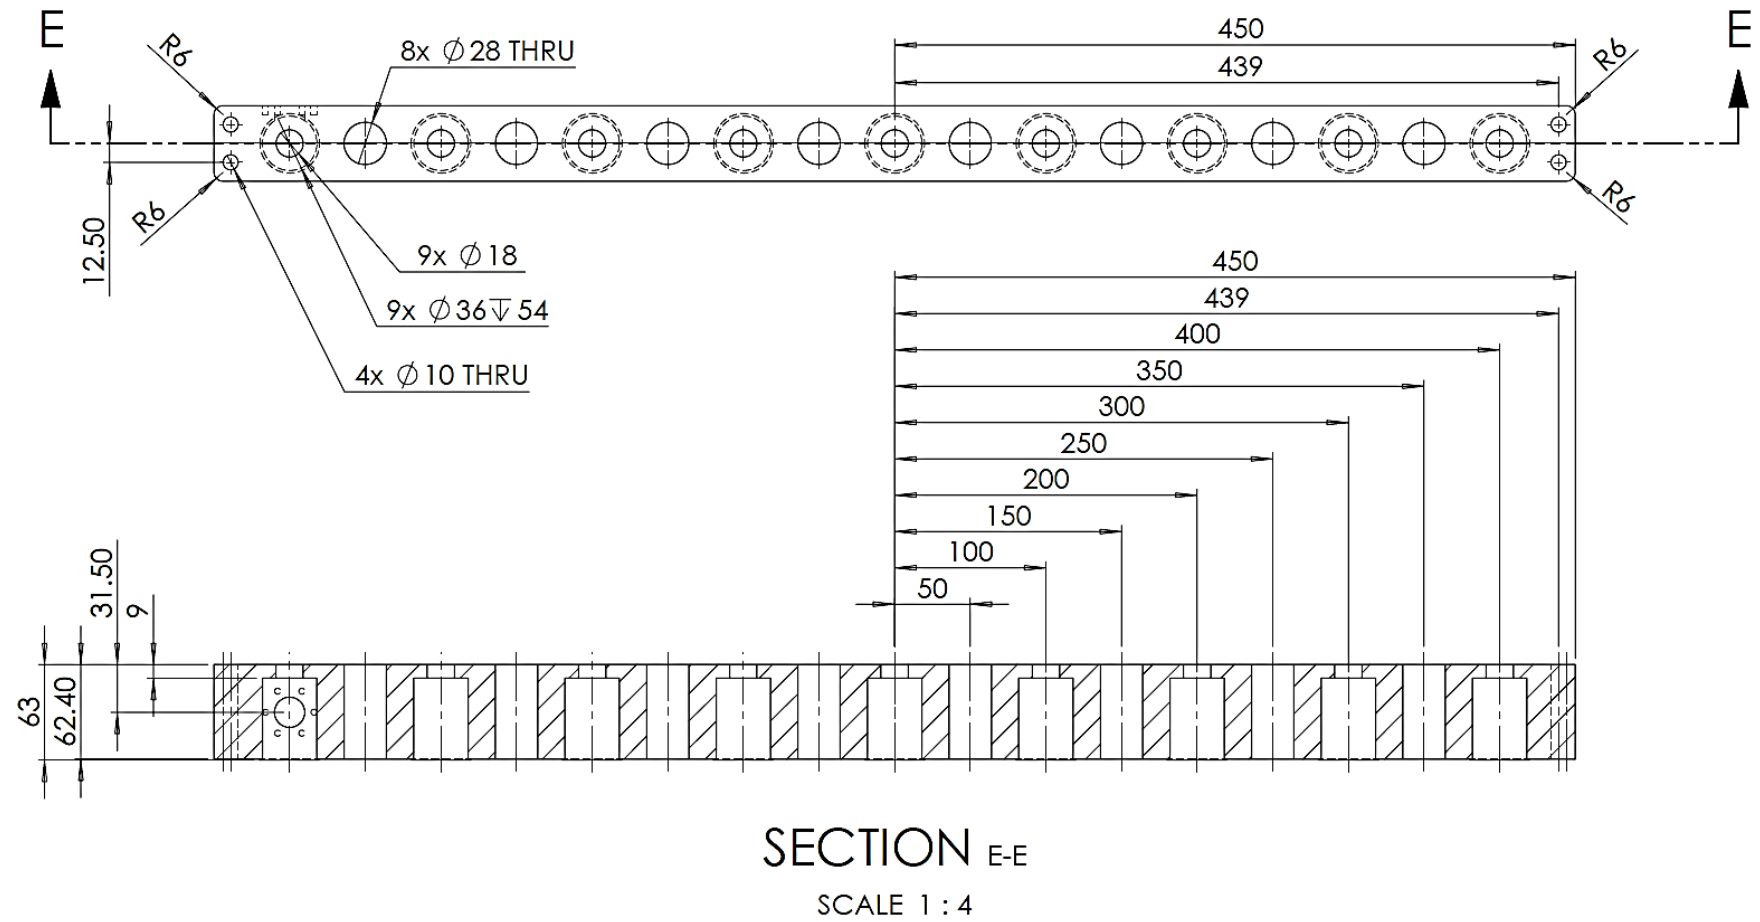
Basic Dimensional drawing of the final design of the Centillion Rectangular member
